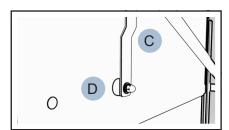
Door Linkage Arm (C) Removal & White Roller (D)
